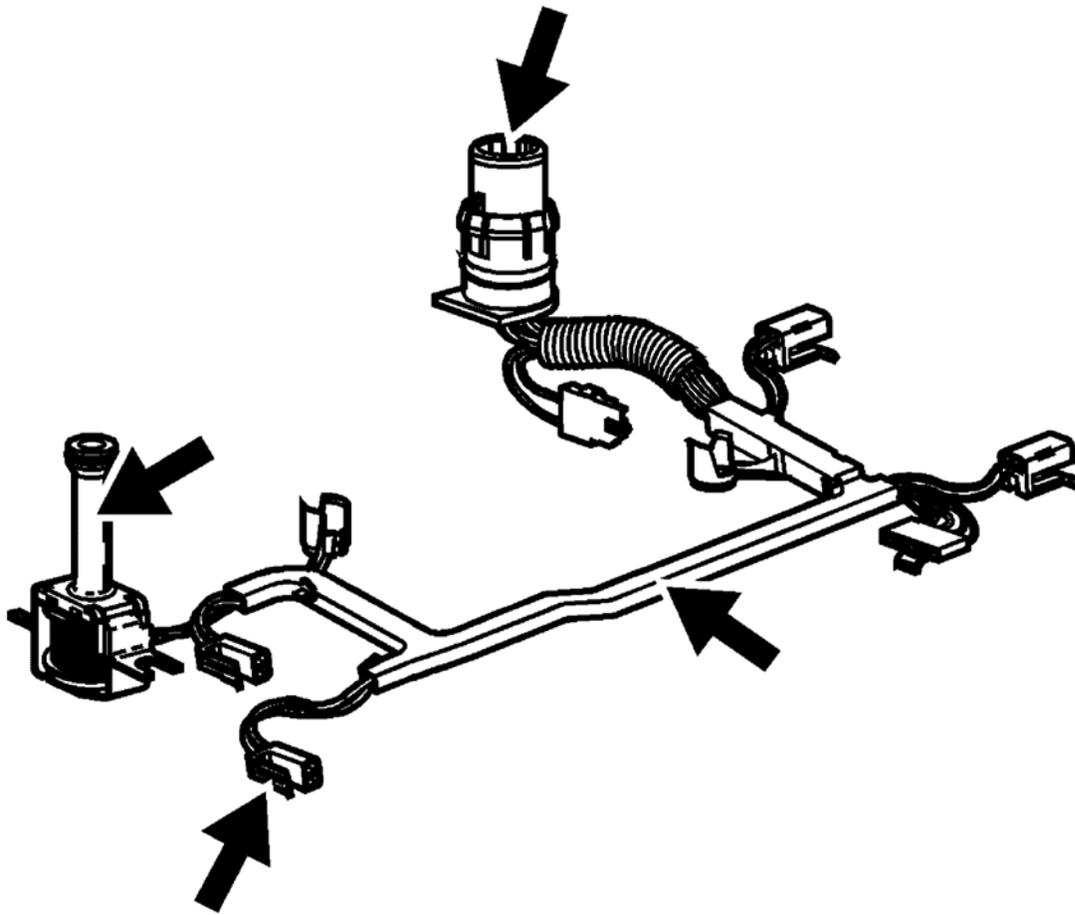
Inspecting Wiring Harness Solenoid Assembly
